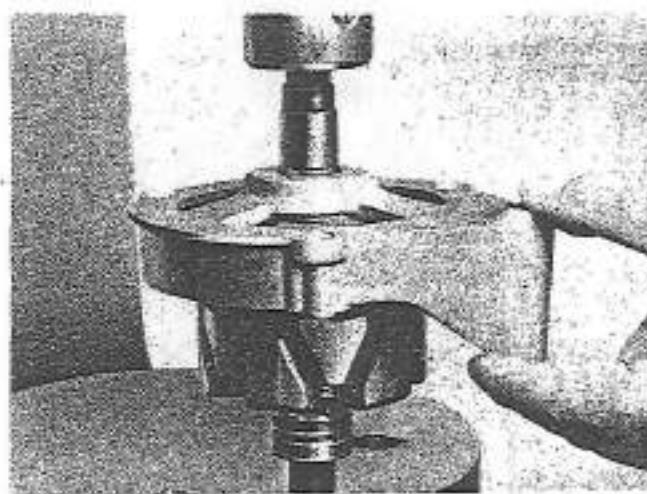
Assembly of the support and pressure ring on the rotor shaft
